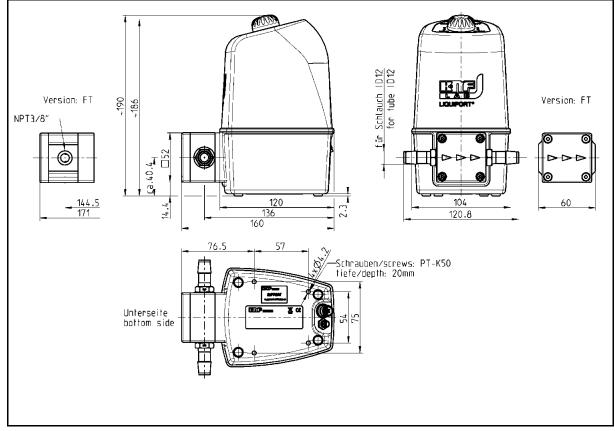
Mounting dimensions LIQUIPORT 300 / LIQUIPORT 1.300
